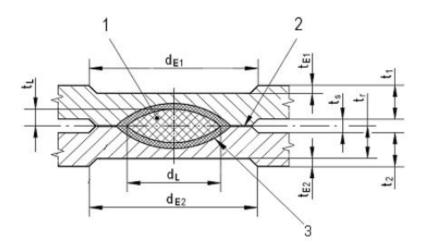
Spot weld. (*VW 01105-1*)
